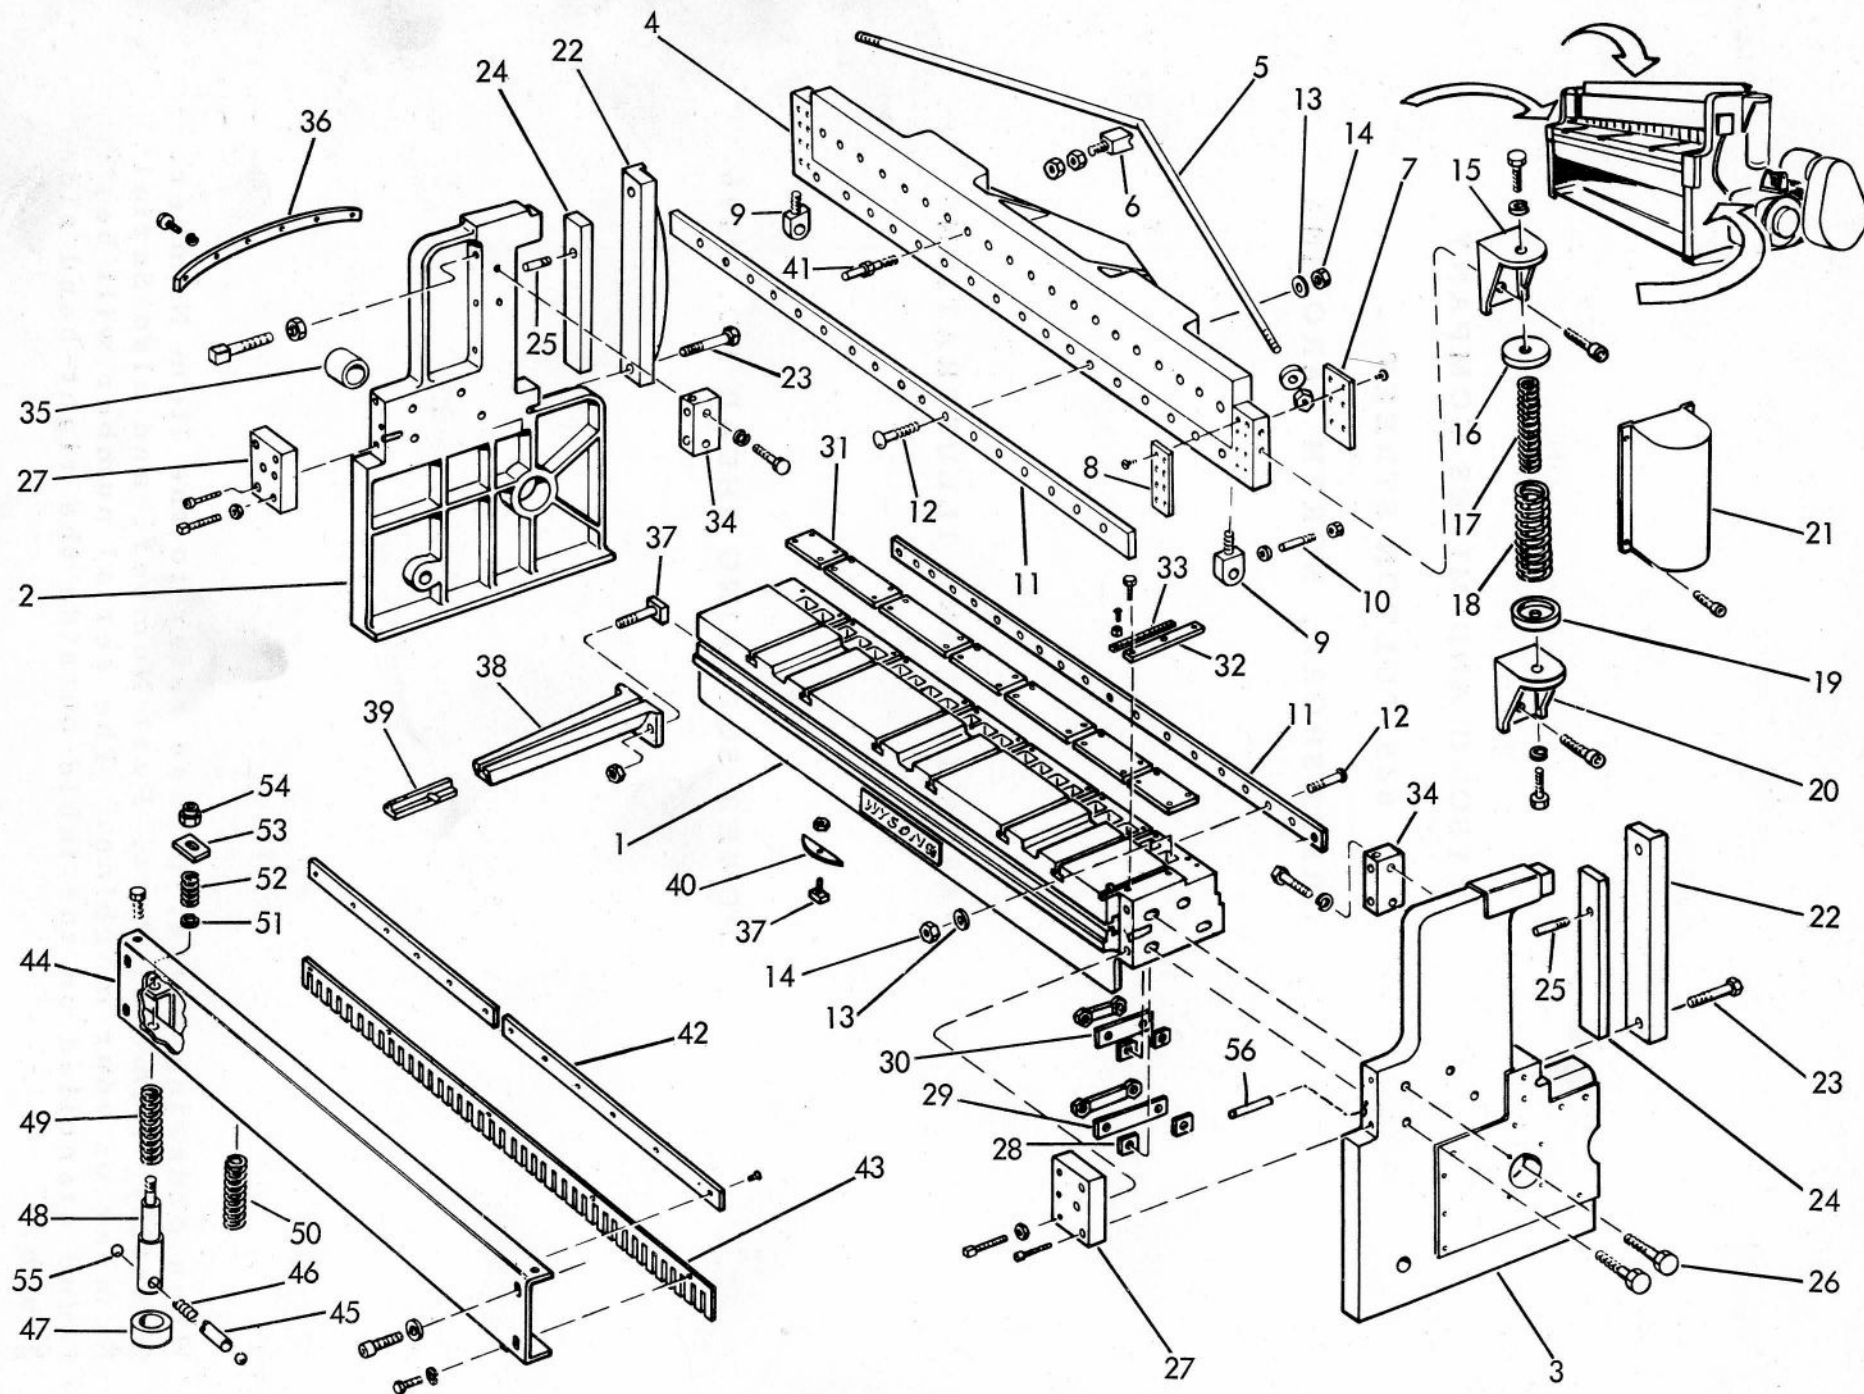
TABLE - END HOUSINGS - FOLD DOWN - KNIFE BAR ASSEMBLY
